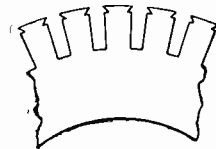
Portion of Stamping for Twelve-Pole Uni-Tooth Three-Phase Alternator
